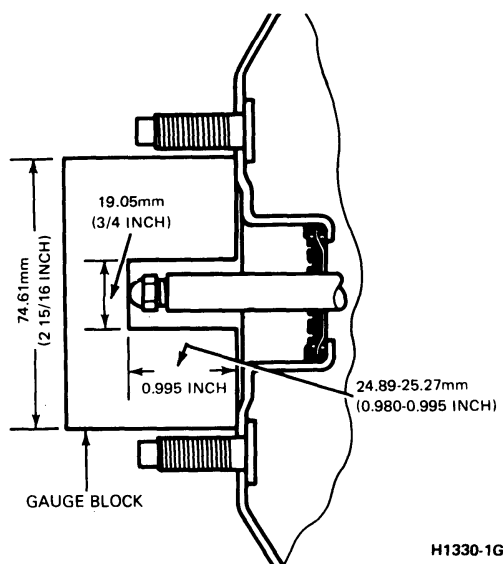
Bendix Booster Push Rod Gauge Dimensions and Adjustment—Bronco, E-100—E-350 and F-100—F-350
